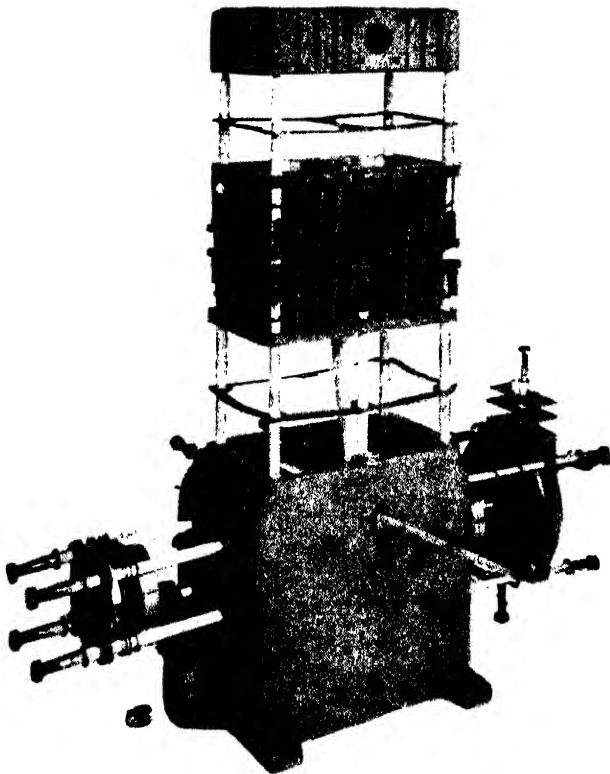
Photographic method of making disassembled illustration. (*The Quincy Compressor Company. John H. D. Langebartel, artist.*)
